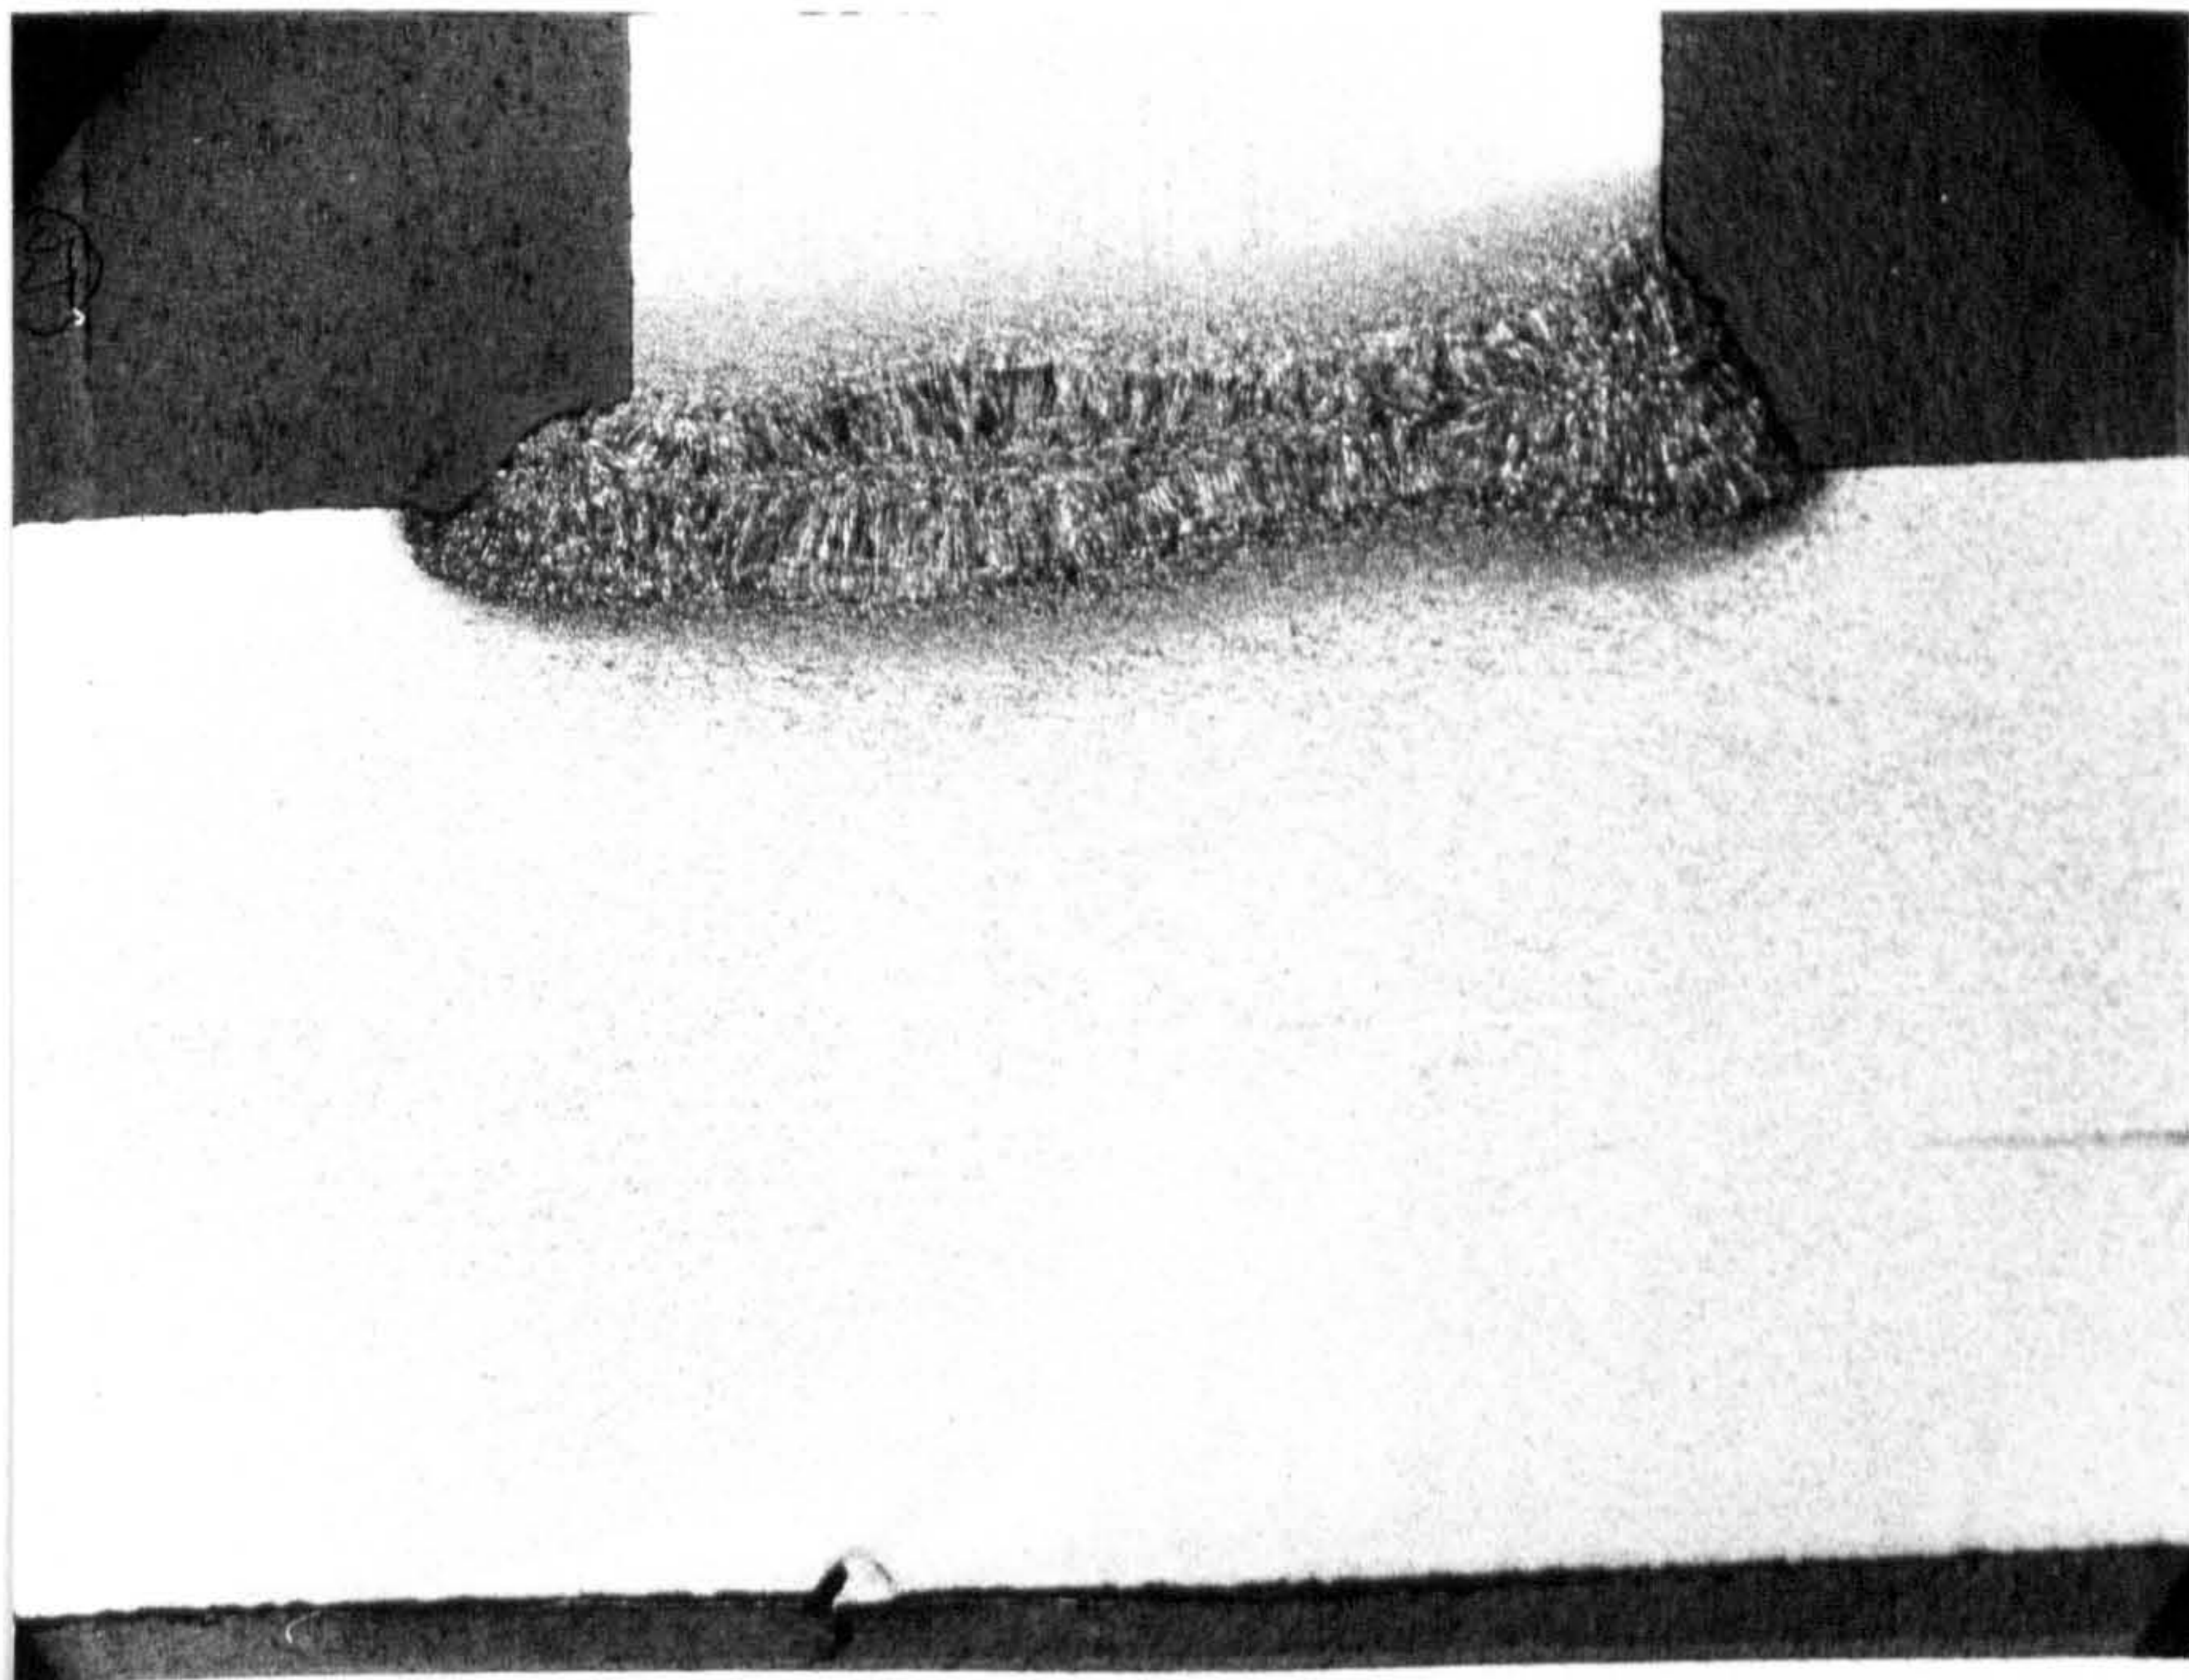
Macrophoto (x4.8) of a skid weld in 12mm thick plate (power = 9kW)
